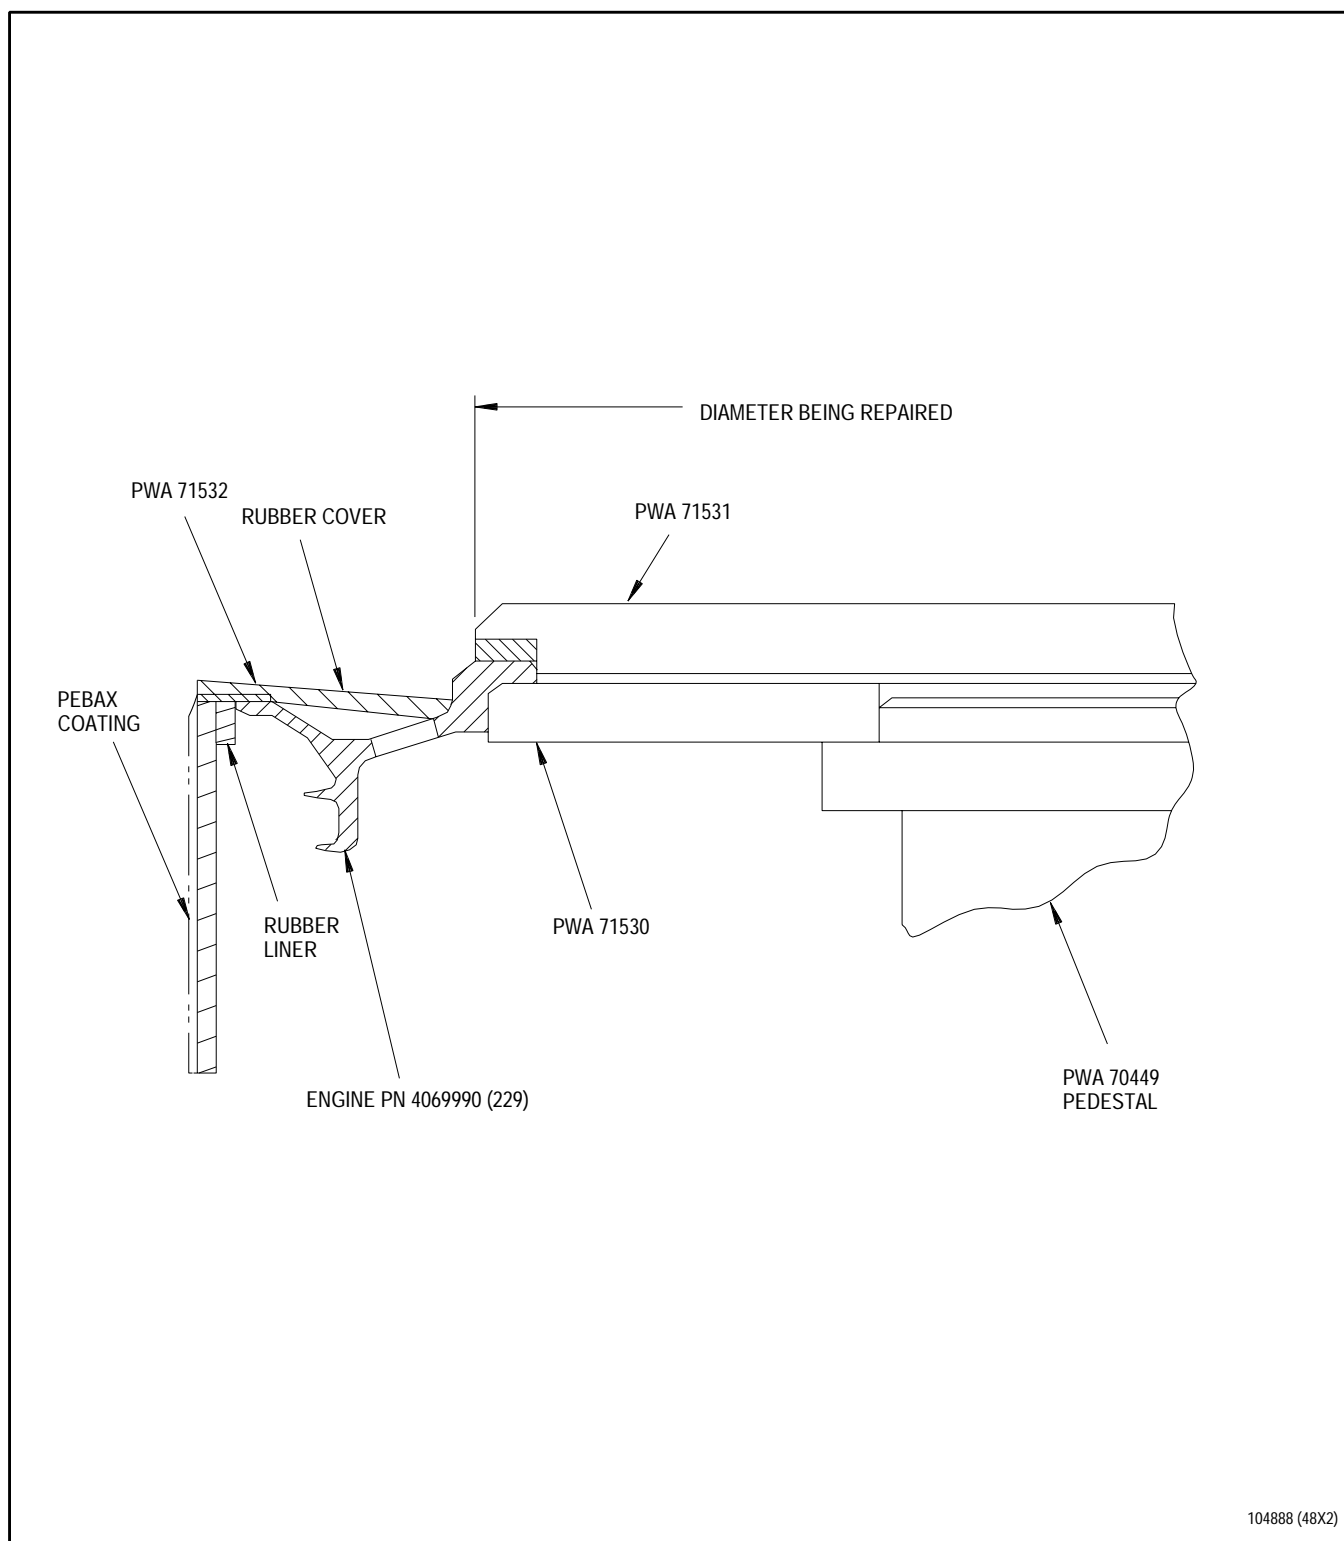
First Stage Turbine Blade Retaining Plate Premachine Fixture
